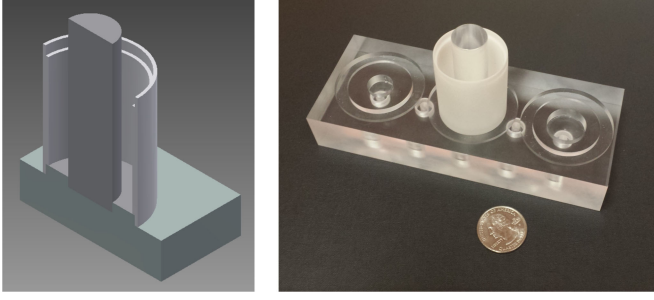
Cut-away view of the assembly (left), and molding (right).
